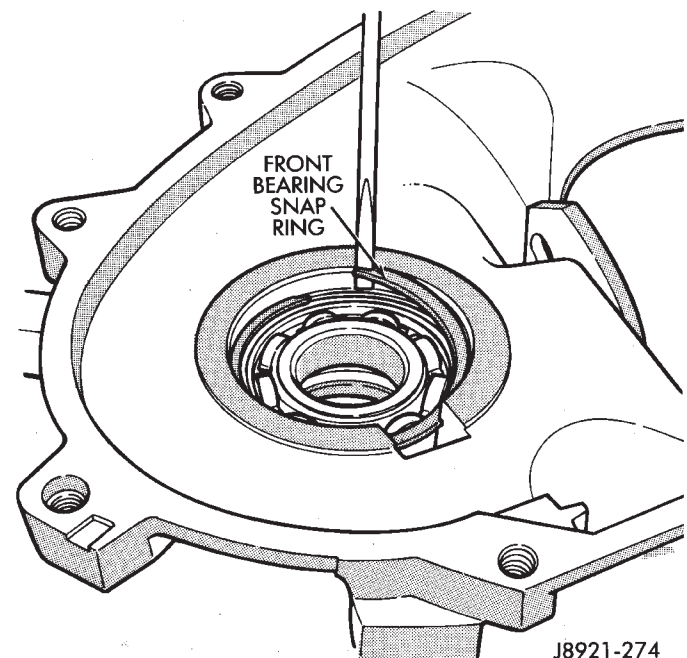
Removing/Installing Front Output Shaft Front Bearing Snap Ring
